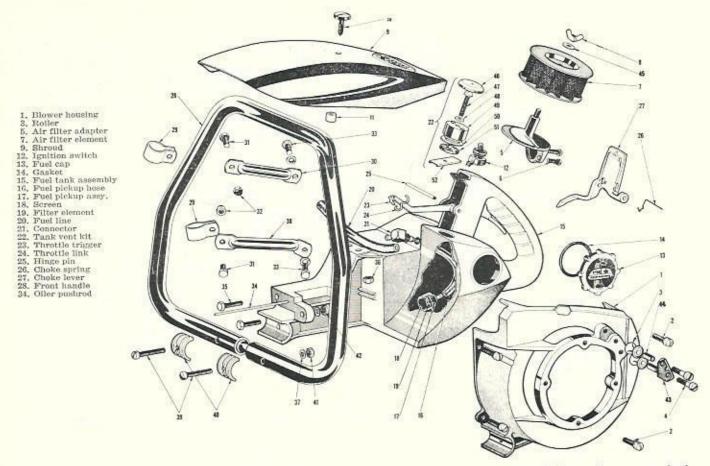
Exploded view of fuel tank, blower housing and air cleaner assemblies for Model 275 chain saw. Components of other model chain saws are similar.
